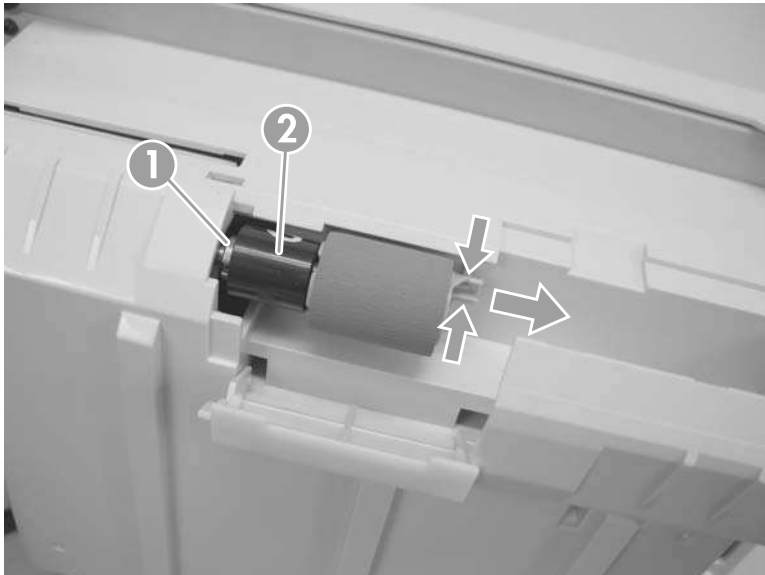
Remove the 1,500-sheet separation roller (1 of 2)
